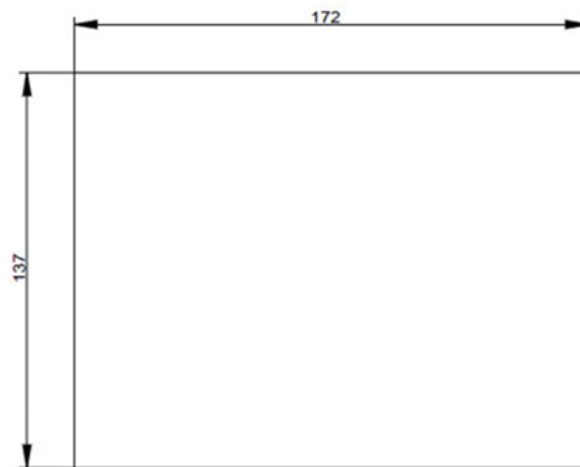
Door Opening Dimensions for NDQ5W Controller Installation Cabinet
